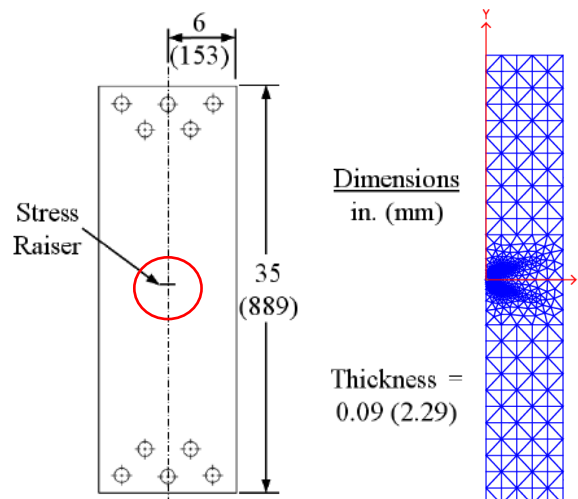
CCP specimen, geometry and dimensions (left), finite elements mesh (right)
